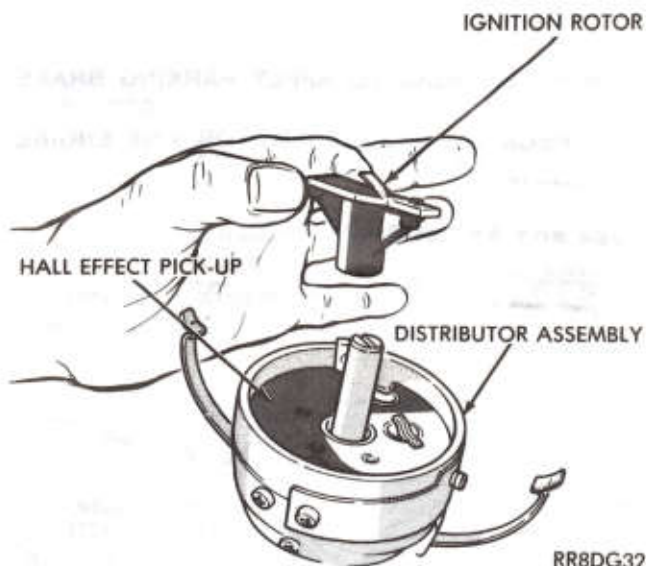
Ignition Rotor Removal and Installation 3.9L and 5.2L Engines
